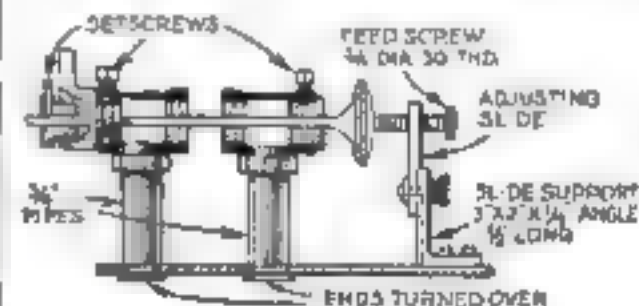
The method of holding the valve stem, which is revolved by a hand crank
